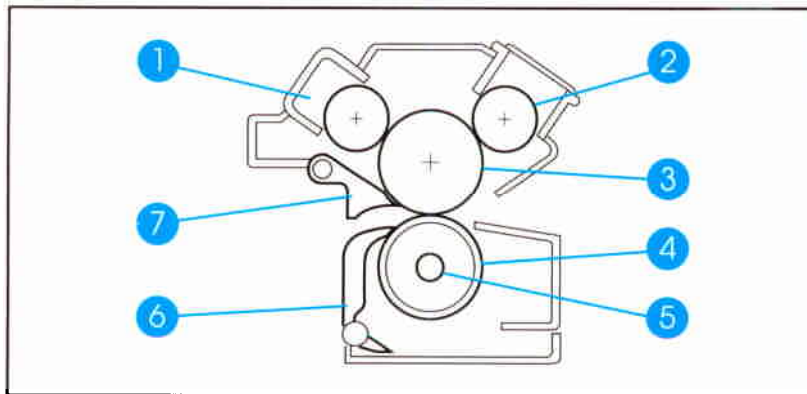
Fusing Assembly (Color LaserJet 5/5M)
